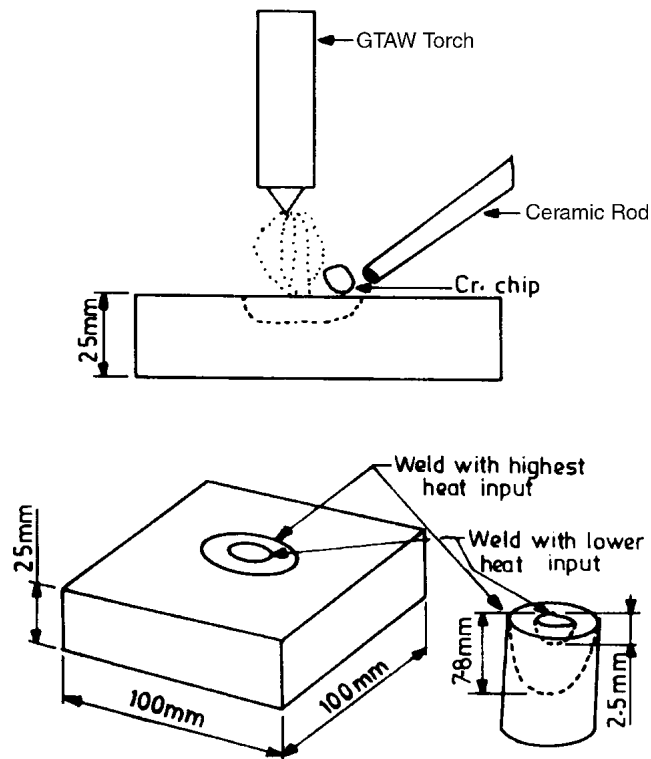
Representation of gas tungsten arc welding (GTAW) welding by adding Cr chips (top). A 316 SS weld pad showing the location of the weld metal and the machined weld metal (bottom)
